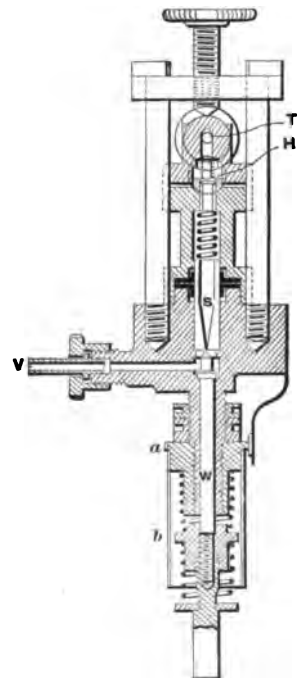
OIL PUMP OF CAPITAINE ENGINE.
